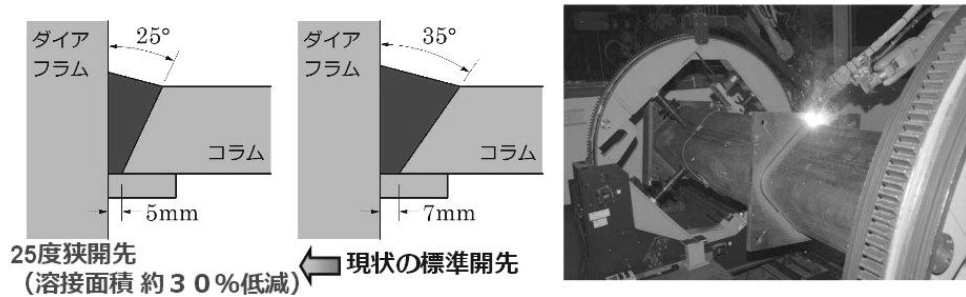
The target of 25deg. Narrow gap welding by “鉄骨造建築物の安全性向上に資する新自動溶接技術の開発”
